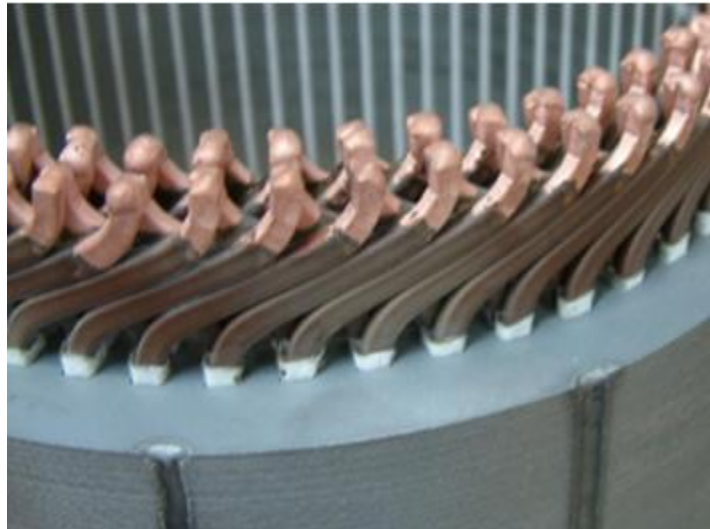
Gas Tungsten Arc Welded (GTAW) Joints in Stator Assembly ⁽¹⁾
